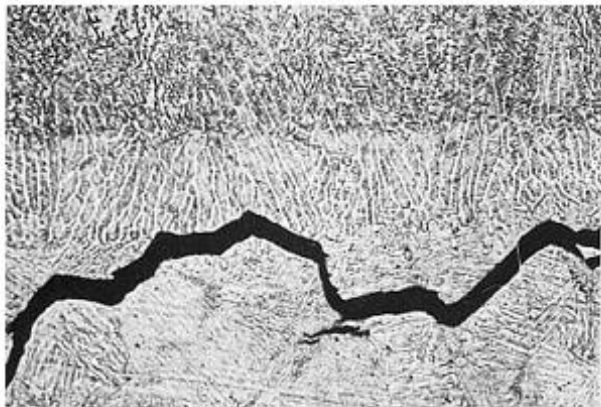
Hydrogen-induced cracking in the PMZ of HY-80 steel. Reprinted from Savage et al. (22). Courtesy of American Welding Society.
